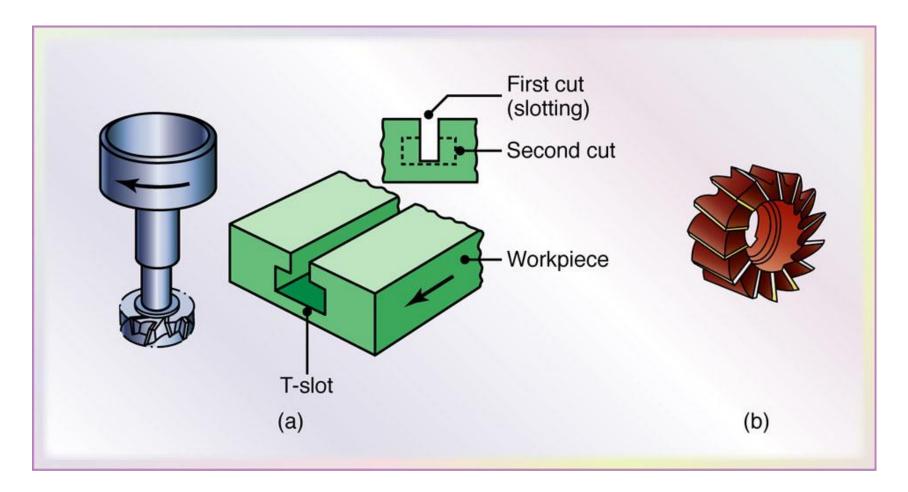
(a) T-slot cutting with a milling cutter. (b) A shell mill.
